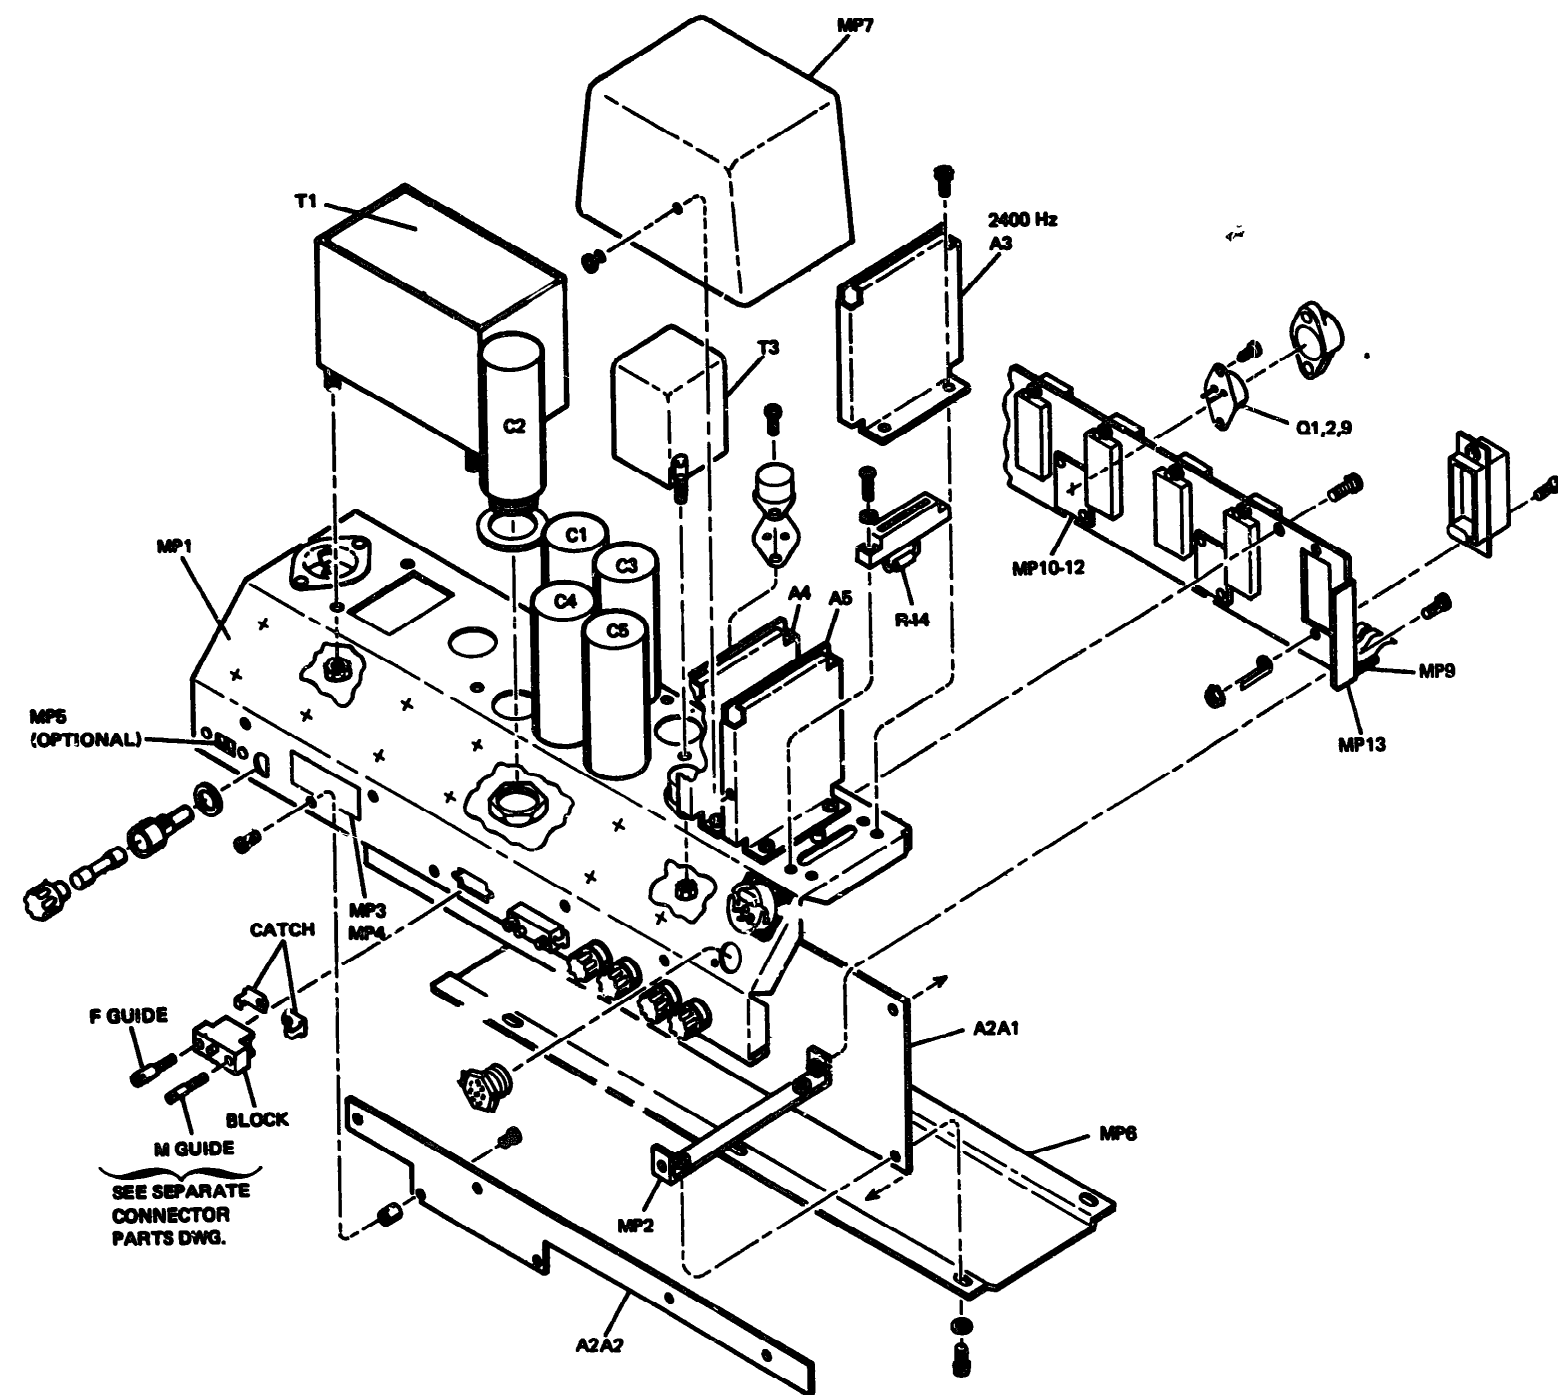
8848A Assembly A2, Power Chassis, Assembly Diagram
